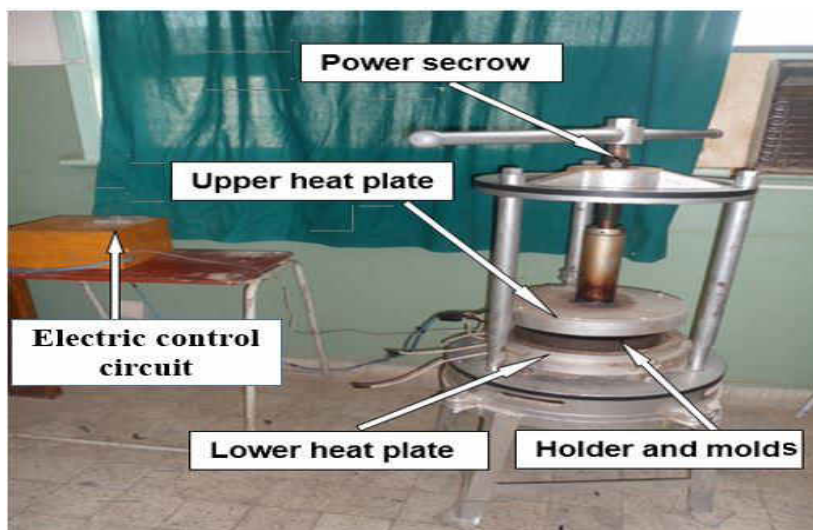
A photograph of the screw press and heating system used in specimens preparation.
